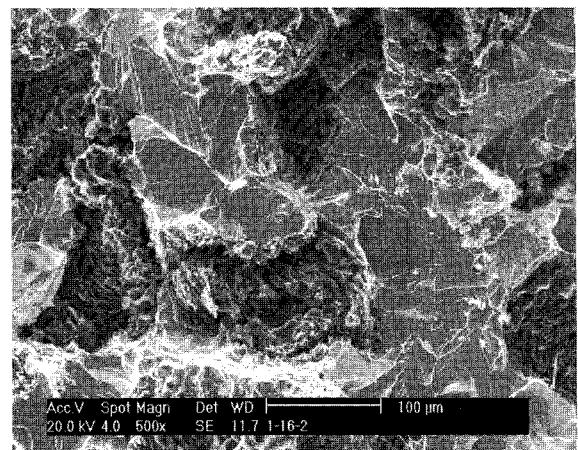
Fractography of tensile test specimen of No.1 ingot.
